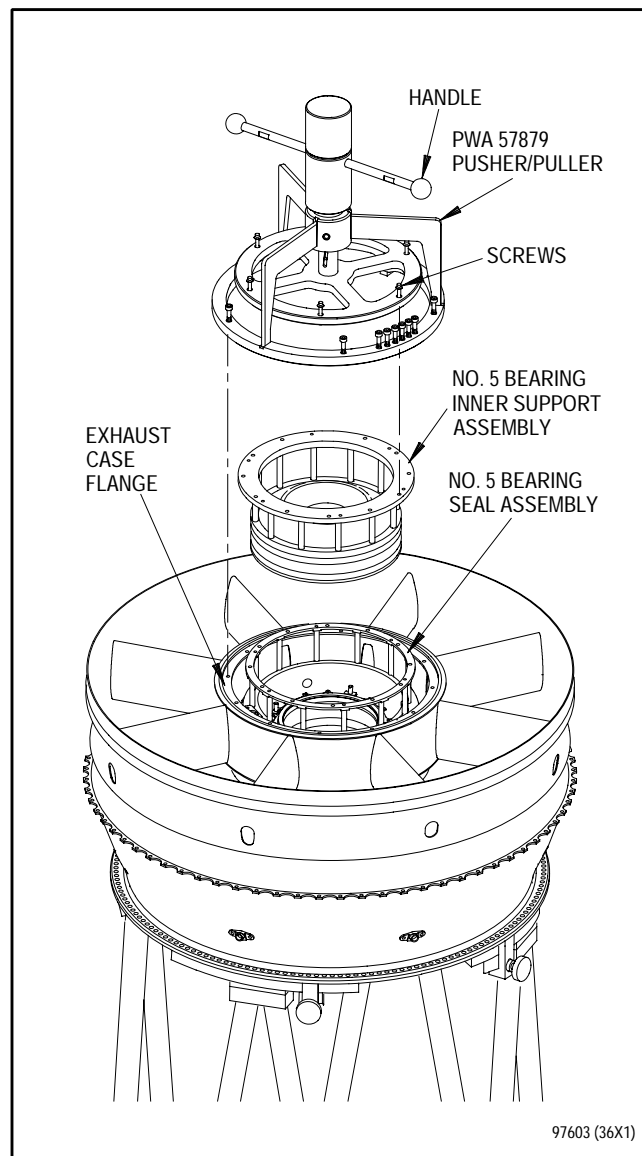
No. 5 Bearing Inner Support Assembly and No. 5 Bearing Inner Race and Rollers - Installation (Sheet 2 of 5)
